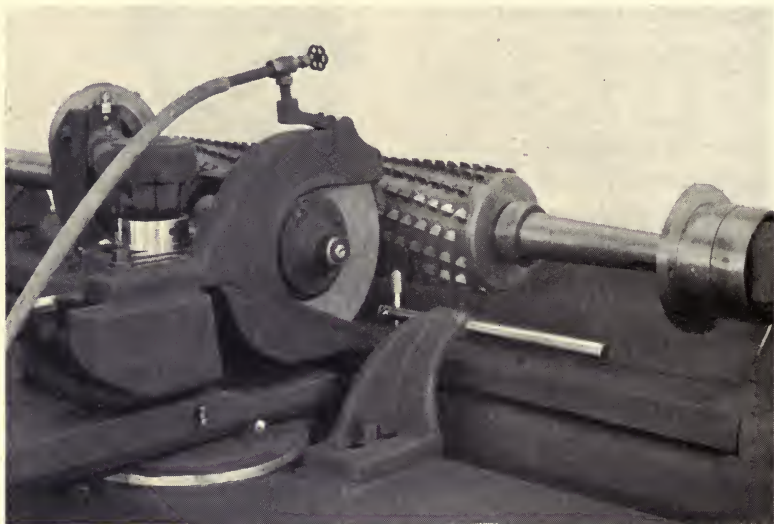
SHARPENING PARALLEL CUTTER ON LANDIS UNIVERSAL GRINDER
